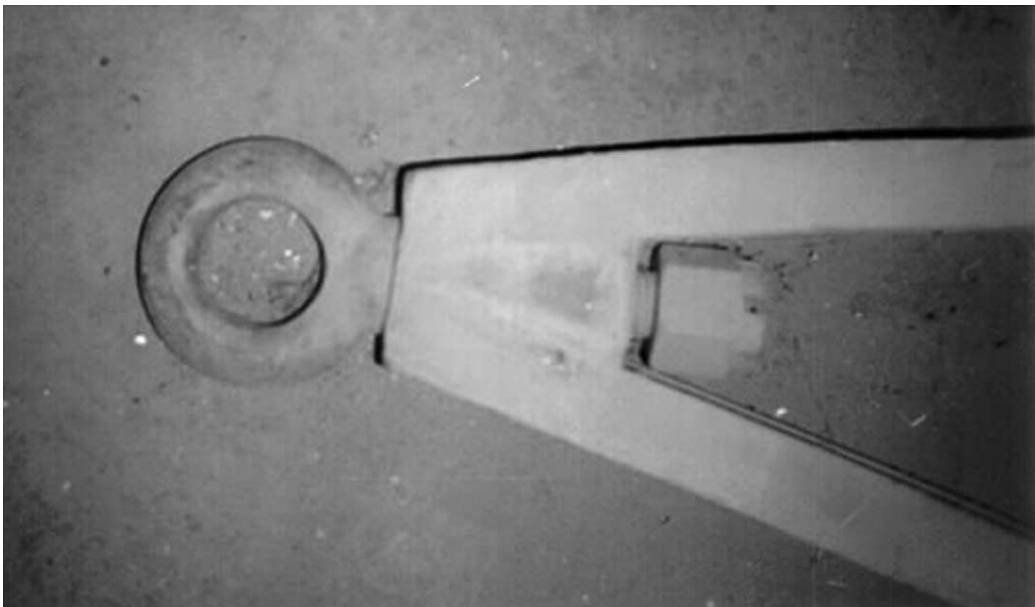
Eye and bolt assembled to the trailer A-frame. The eyebolt is connected to the tractor mooring hoop.
